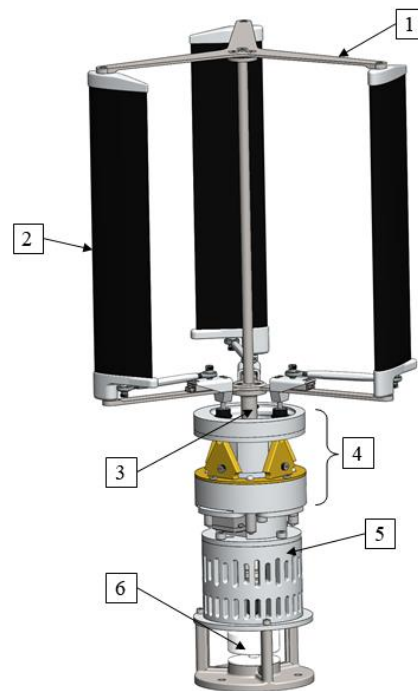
The complete turbine assembly. The assembly includes the rotor arms (1), airfoils (2), main shaft (3), cam and lifter assembly (4), main housing (5), and anemometer (6)
